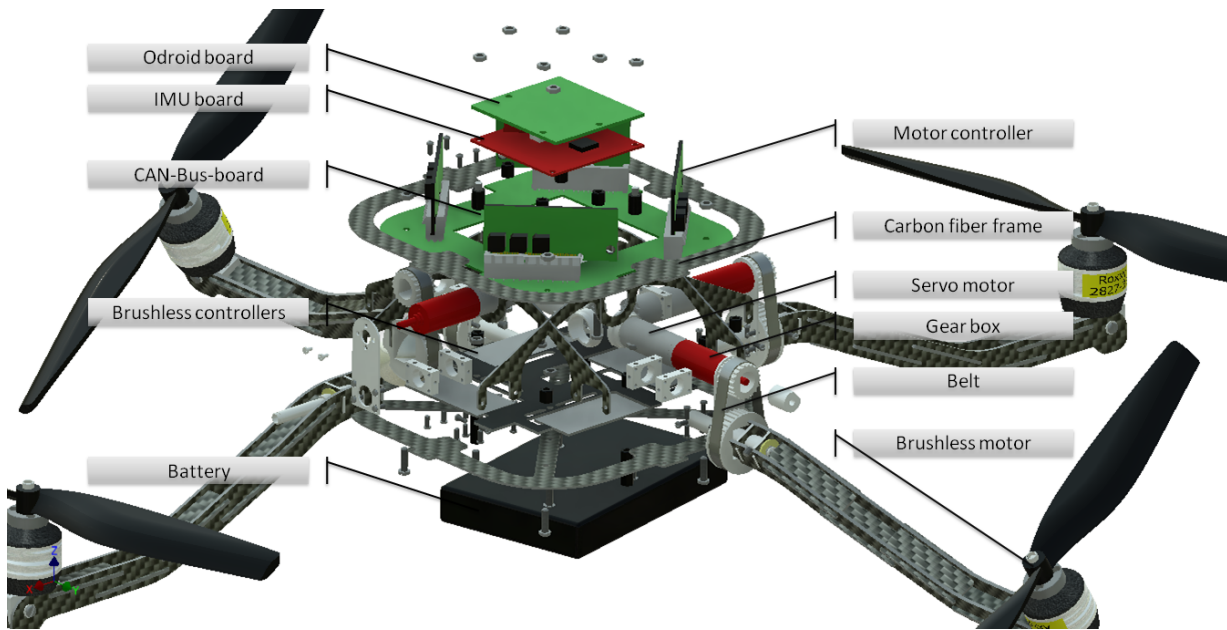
Exploded view of the various components of the holocopter version 2. All the important parts are properly labeled
